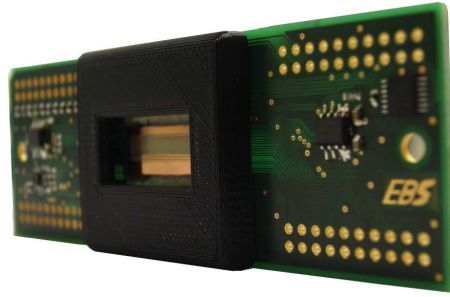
Chip-on-board: The 750 μm thick, solid version of the fabricated image sensor wire-bonded on a PCB board for test purposes. The black cover is a 3D-printed part providing protection to the bare chip and bonding wires.
